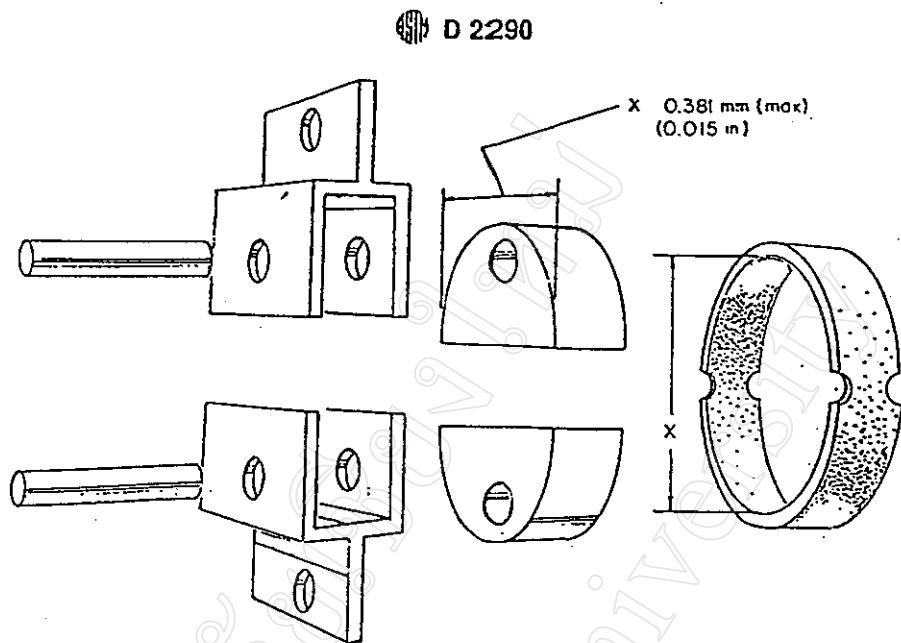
Test Fixture for Reduced-Section Molded or Extruded Ring Specimen
